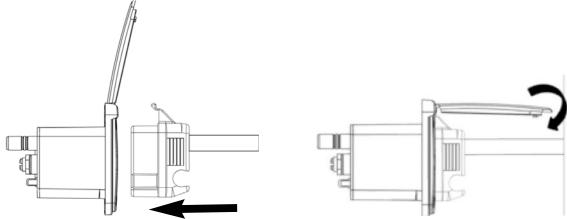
& 8b Insert Easi - Push Plug and Lock in Place
